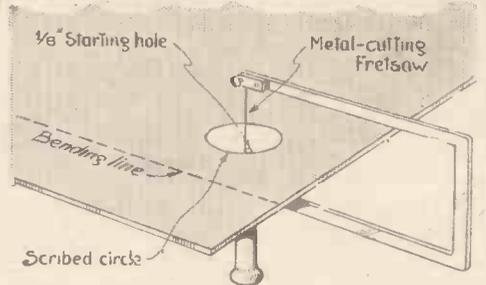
Large holes for the metal chassis are most easily cut with a metal-cutting fretsaw. Note the starting hole
